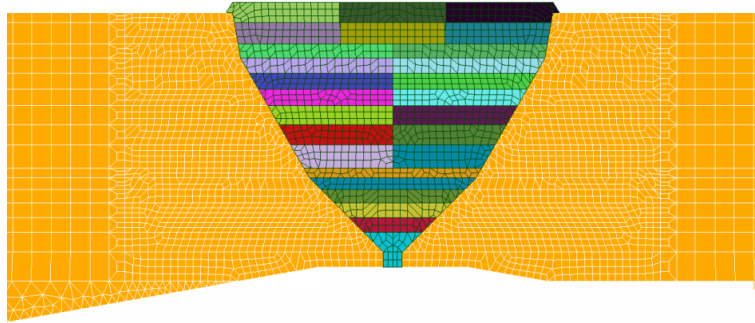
Example of 2D mesh of a butt weld with each bead in different colour
